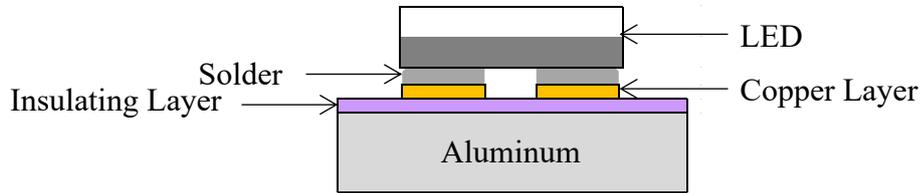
Step 1: Soldering an LED to an aluminum-core PCB
